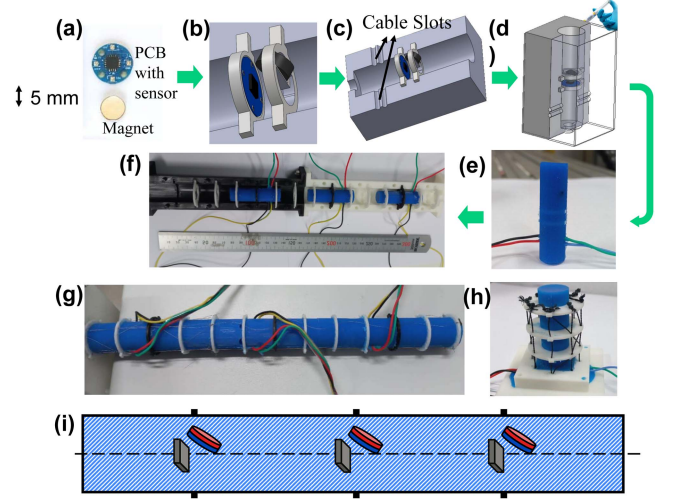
Fabrication process: (a) Fabricated PCB with 3-axis sensor and magnet. (b)–(e) fabrication of the single-segment manipulator. (f) Building of the three single-segment manipulator, (g) Actuated three-segment manipulator. (h) Actuated single-segment manipulator. (i) cross-sectional layout of the sensorized manipulator.
